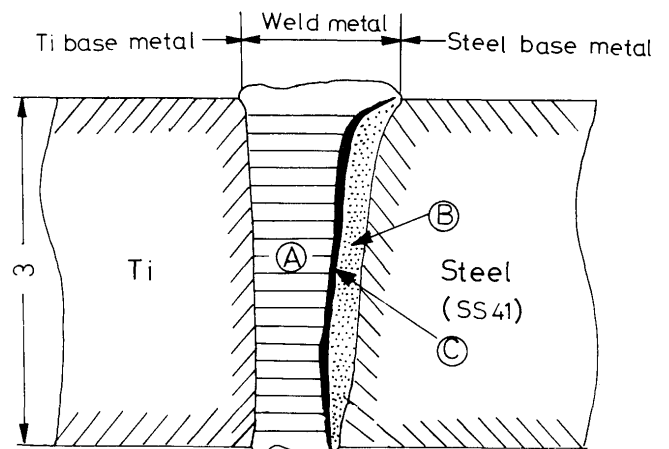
Schematic illustration of welded joint in cross-section
